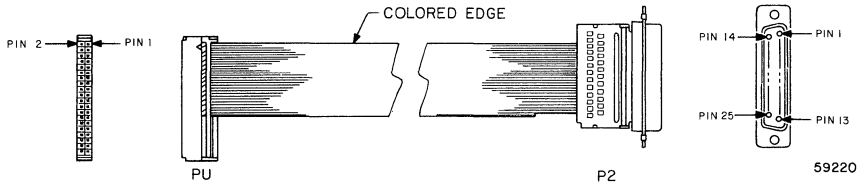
Internal RS232 Communications Cable Assembly 2824678
